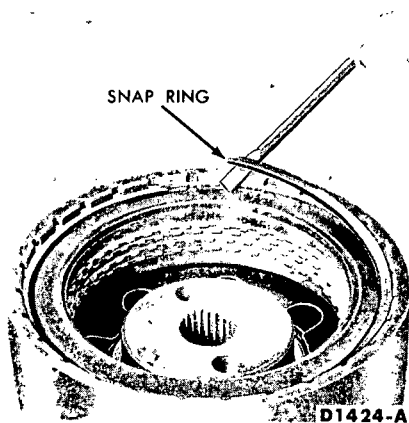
Removing Forward Clutch Pressure Plate Snap Ring
